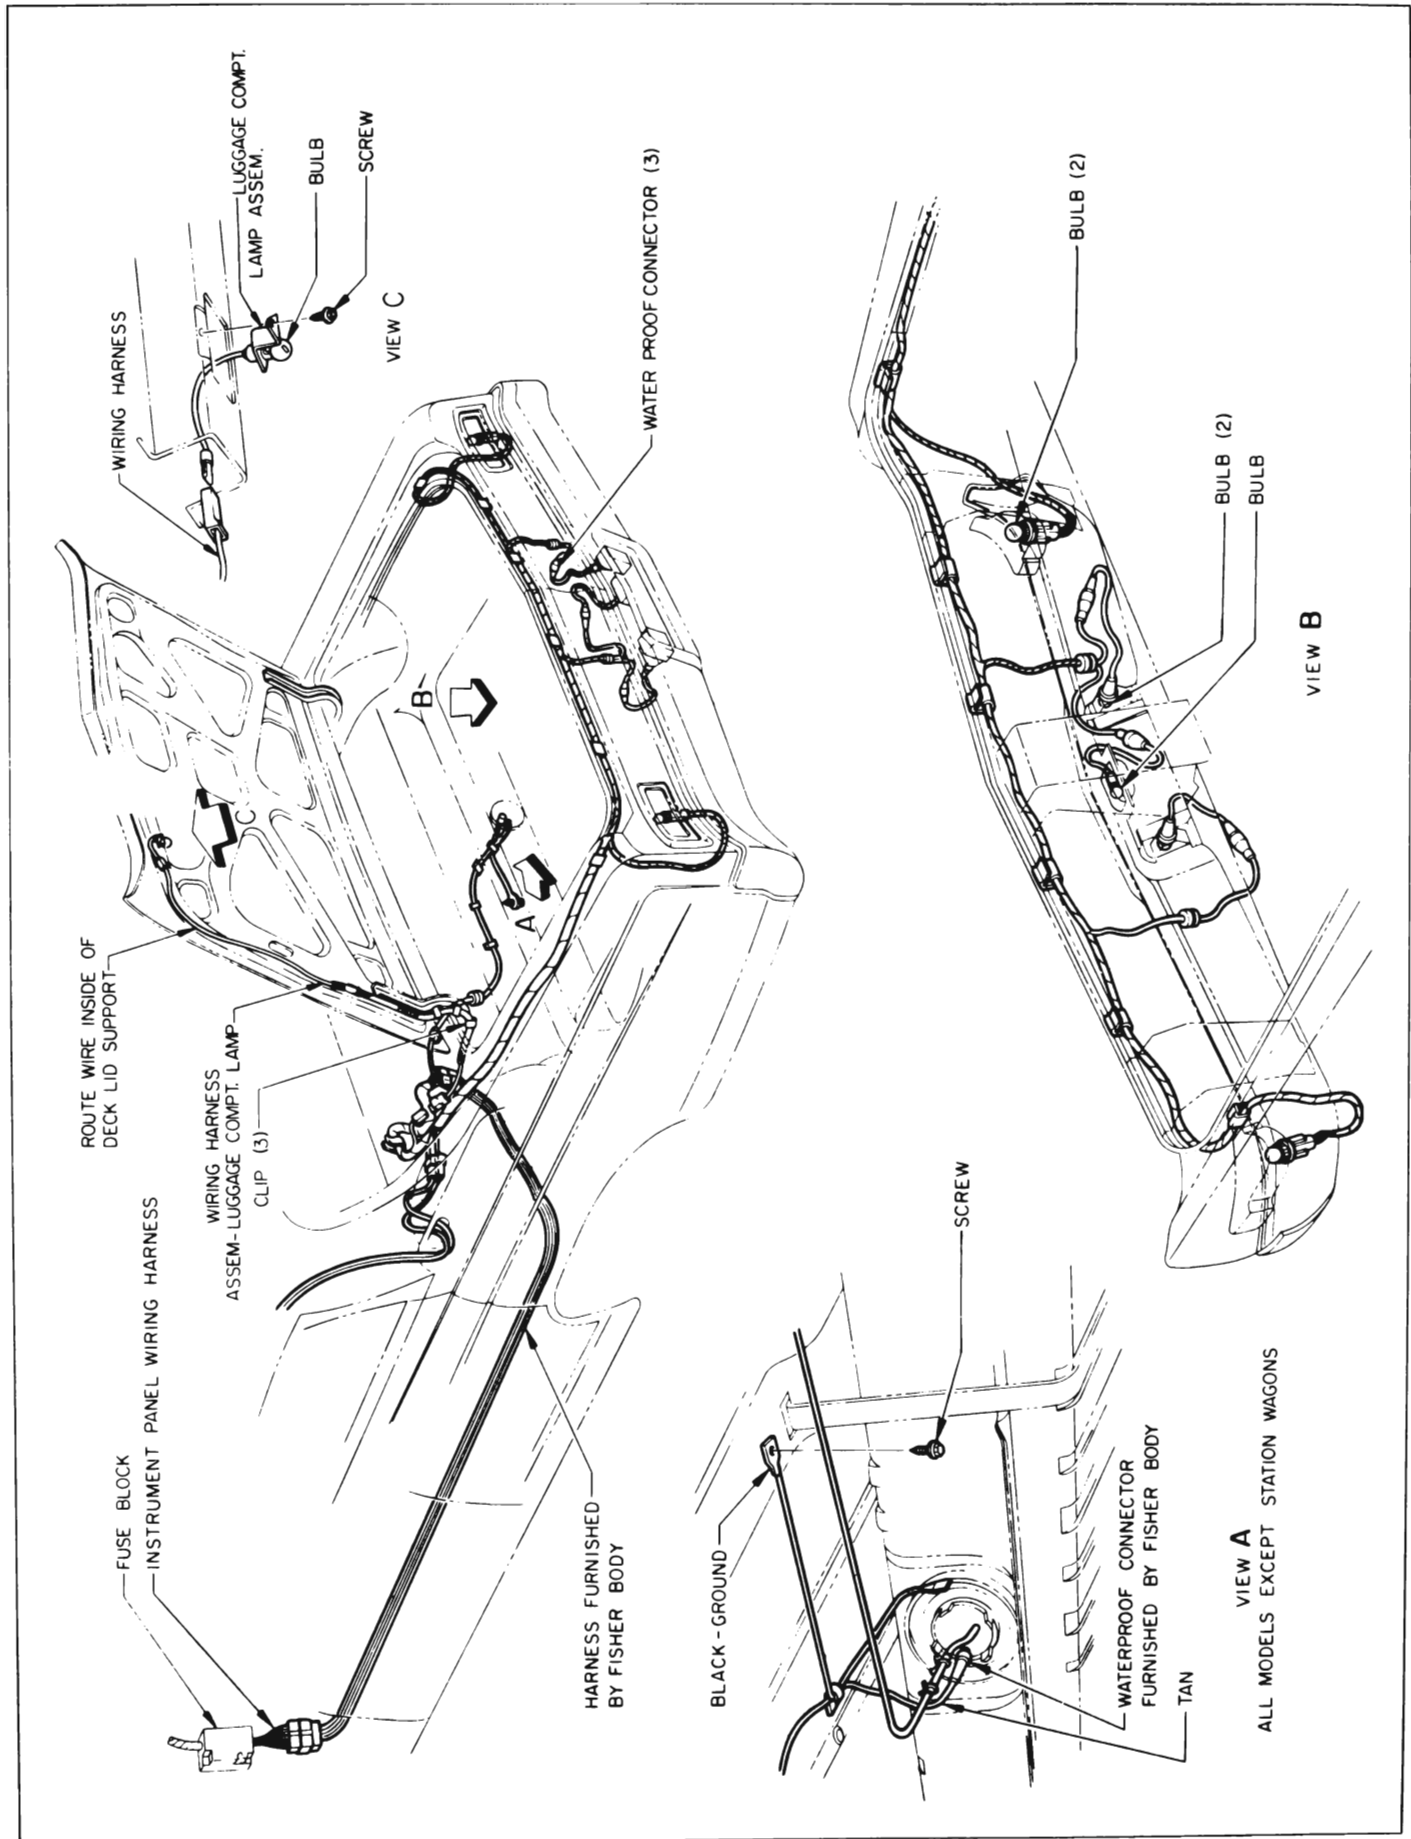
Rear Lamps and Fuel Gauge Tank Unit Wiring
